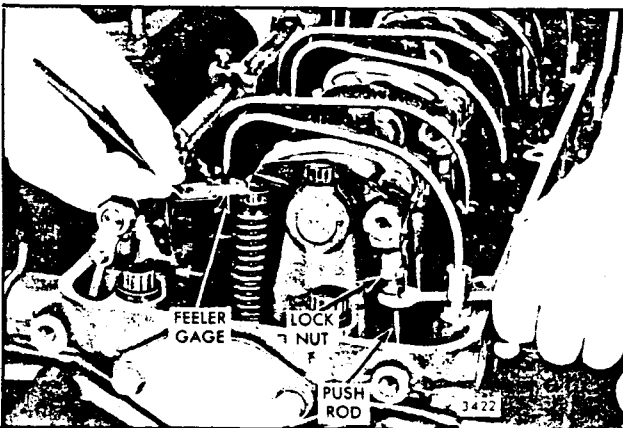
Adjusting Valve Clearance (Two-Valve Cylinder Head)
